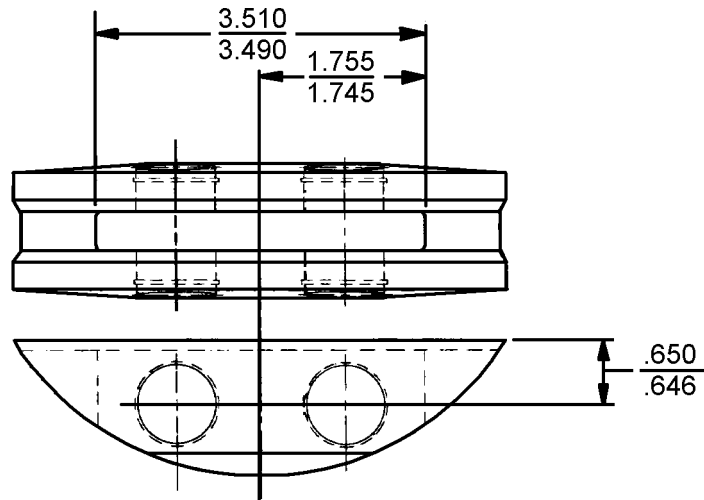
D. 639197 COUNTERWEIGHT ASSEMBLY MADE WITH 633339 COUNTERWEIGHT AND 639193 BUSHINGS
